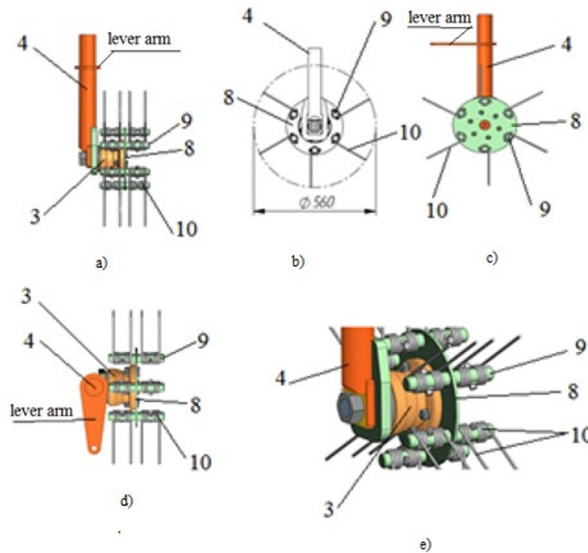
Roller with spring teeth: a – straight view, b – left view, c – right view, d – top view and e – drawing of the rink.
